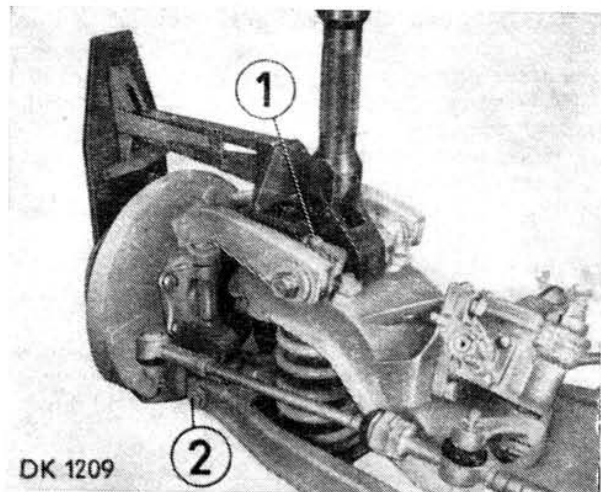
/9 - Adjusting Wheel Camber by Inserting Shims Between Axle Body and Upper Wishbone Bracket (1) and by Turning the Eccentric Pin in King Pin Socket (2) by Its Protruding Head
